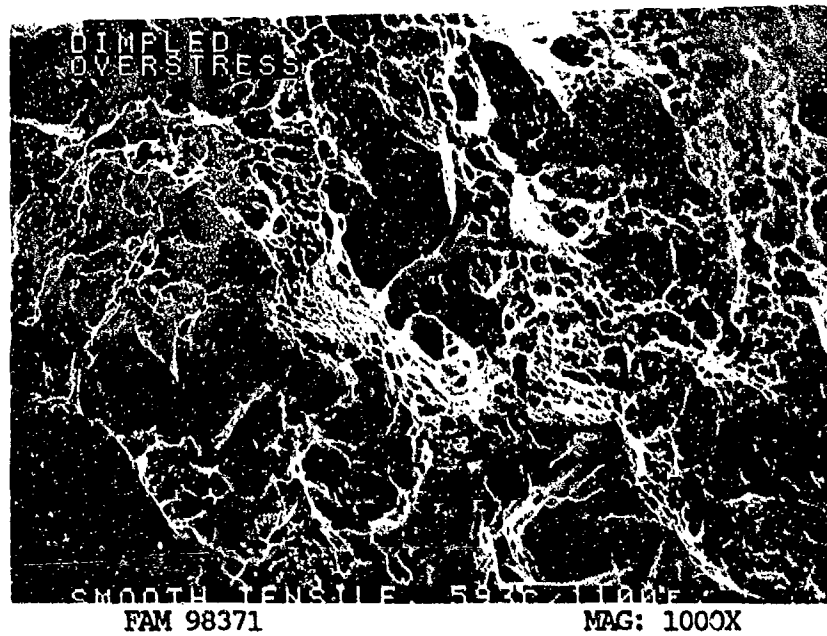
Fine equiaxed dimples in the primary fracture area. A fractured carbide is visible (arrow).
